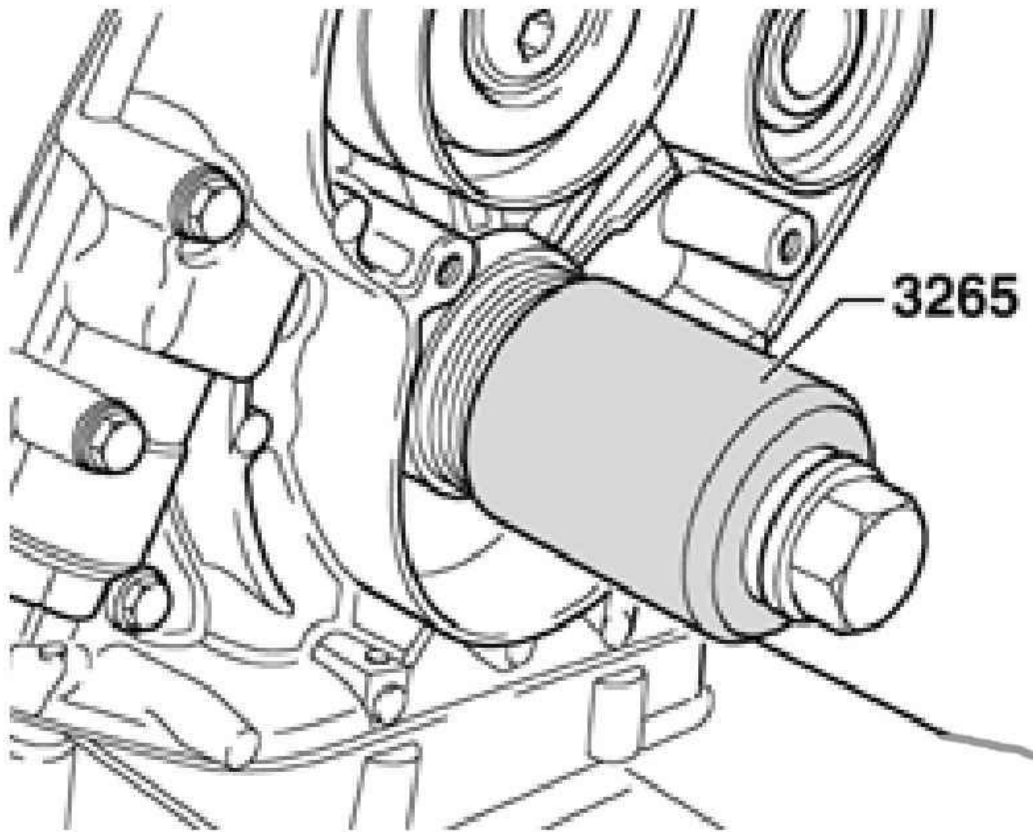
Removing Crankshaft Front Oil Seal Using Oil Seal Extractor 3203
